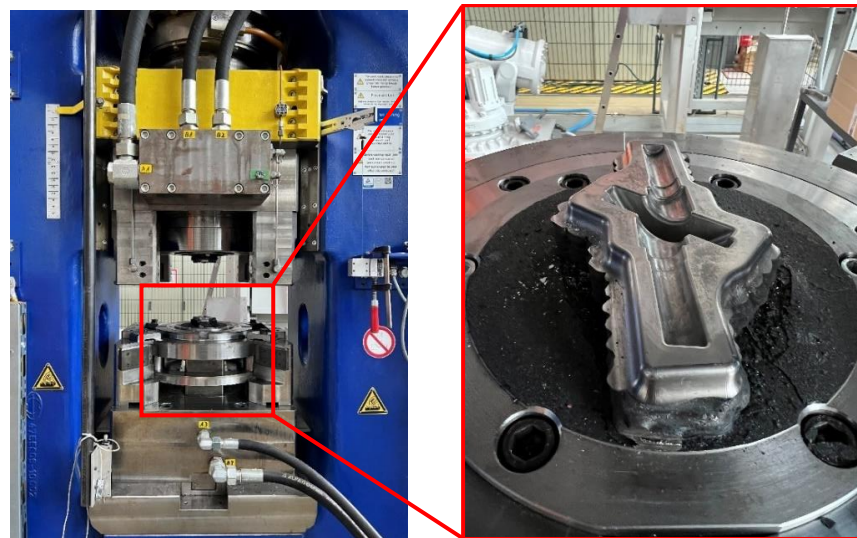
Assembly of WA-DED-manufactured tools in the press.
